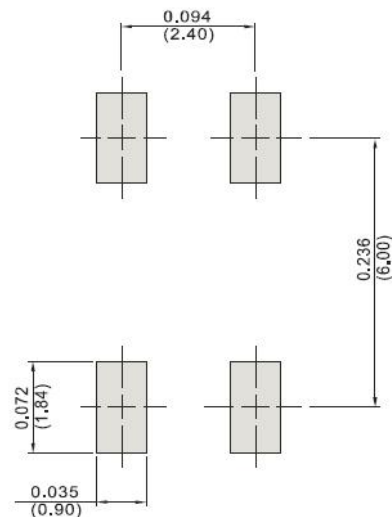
MOUNTING PAD LAYOUT (mm/Inches)
